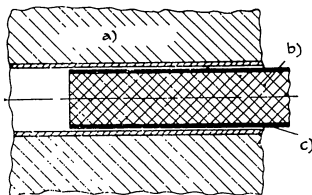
Design of Control Rod for a Fast-Neutron Reactor
